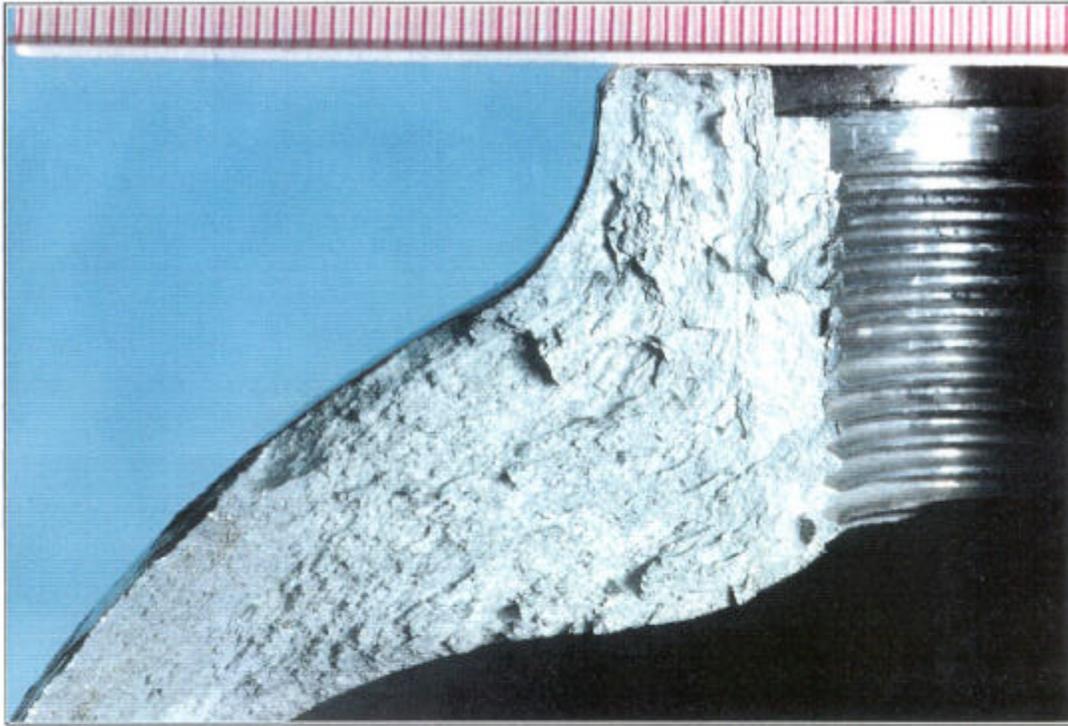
CLOSE UP PHOTOGRAPH OF THE CRACKED REGION OF THE CYLINDER HEAD -- ITEM 3A
